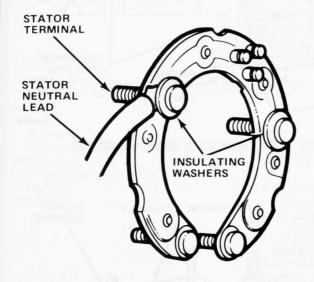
E-31 Rectifier Assembly with Exposed Diodes
